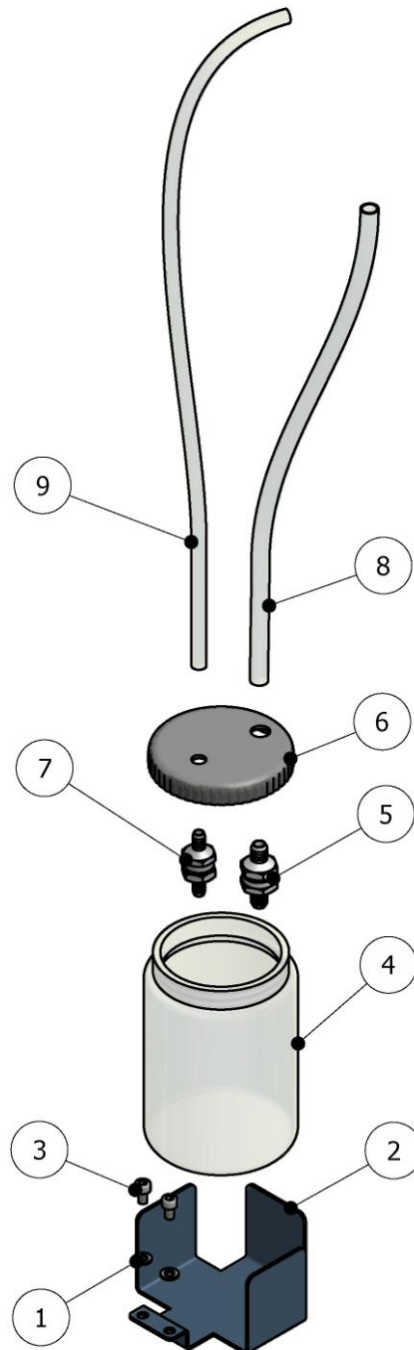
Lube Reservoir Hose Assembly, Exploded View
